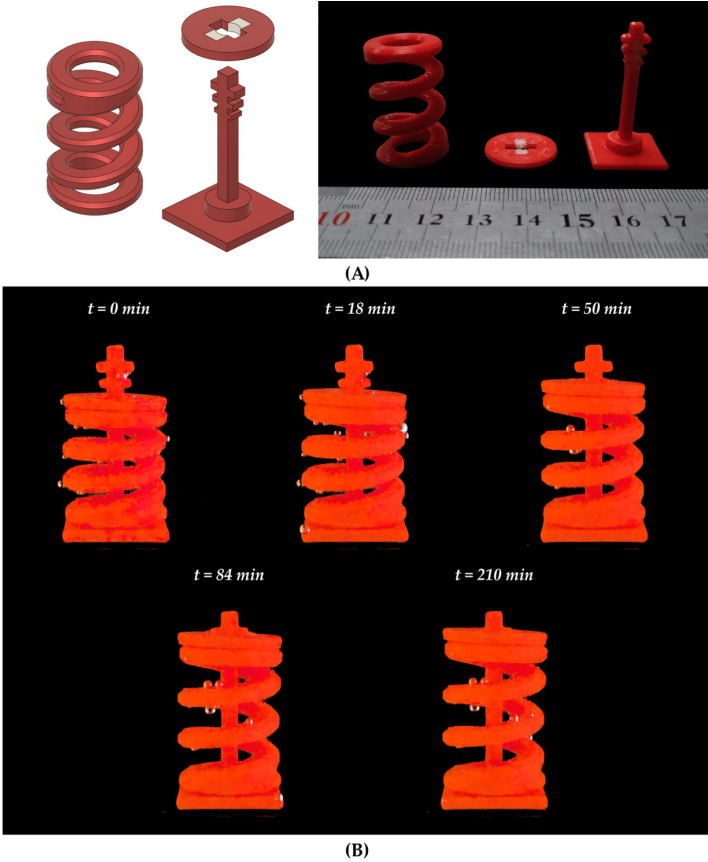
(A) CAD models & prototypes and (B) shape-morphing test for actuator 11.
